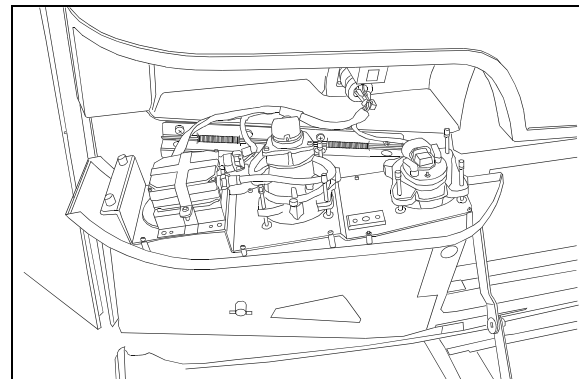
OPENING HEADLIGHT ASSEMBLY
